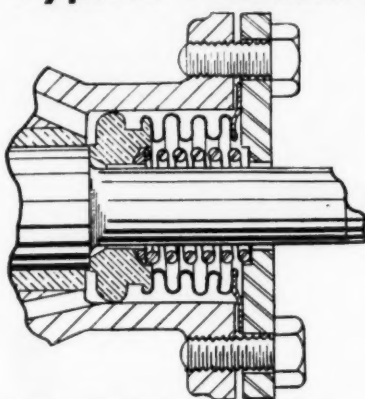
Bellows seal and cover plate which is used for the seal of Kelvinator compressors.
